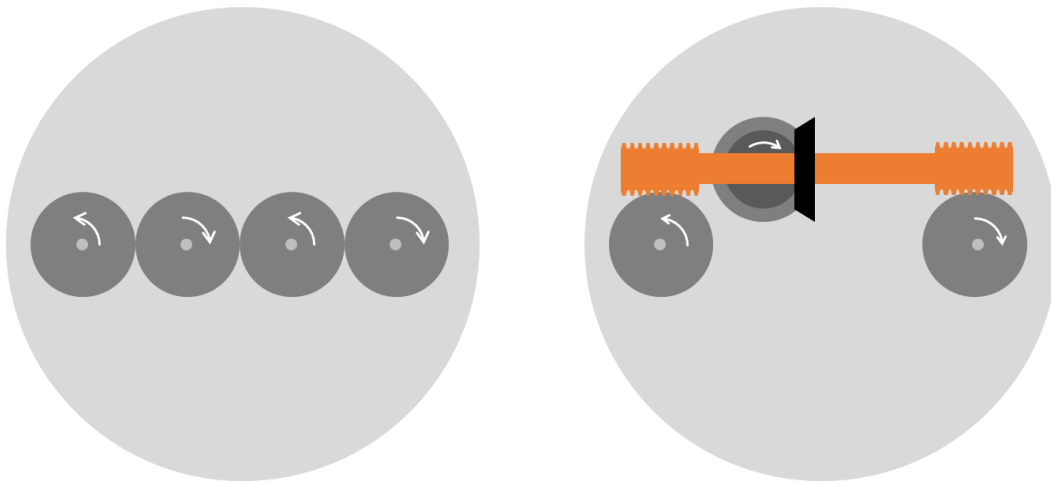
Left: the current steering gearing on the prototype. Right: the proposed gearing for future iterations.
